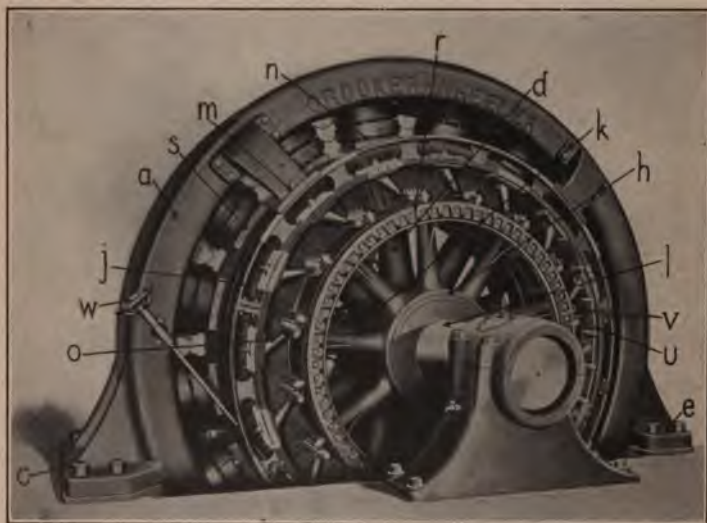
Large Engine-Type Generator—600 Kilowatts—Built by the Crocker-Wheeler Company.
